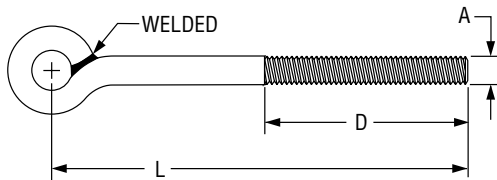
X: Not Welded Fig. 278X: Welded
